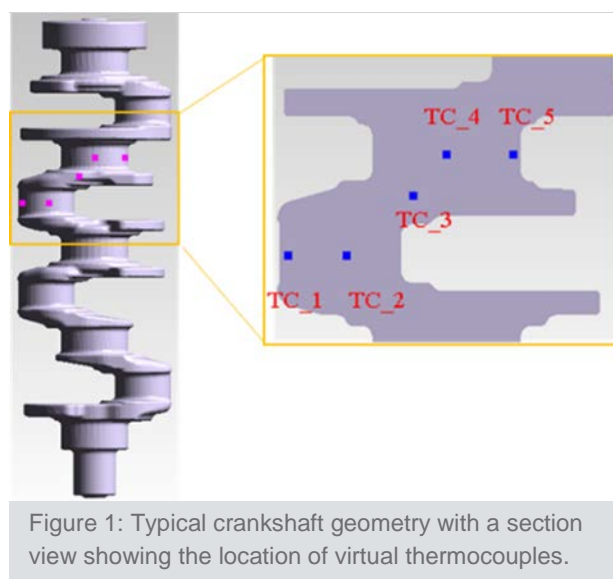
Typical crankshaft geometry with a section view showing the location of virtual thermocouples.
